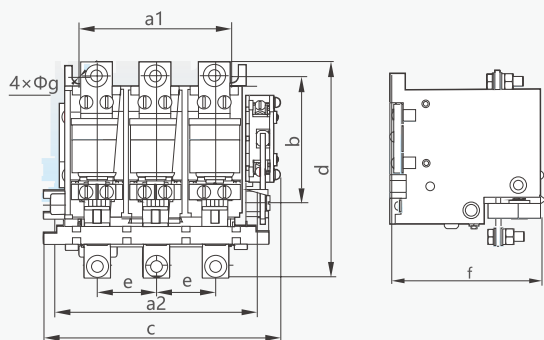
CKJ5-250 Appearance and Installation Dimensions
